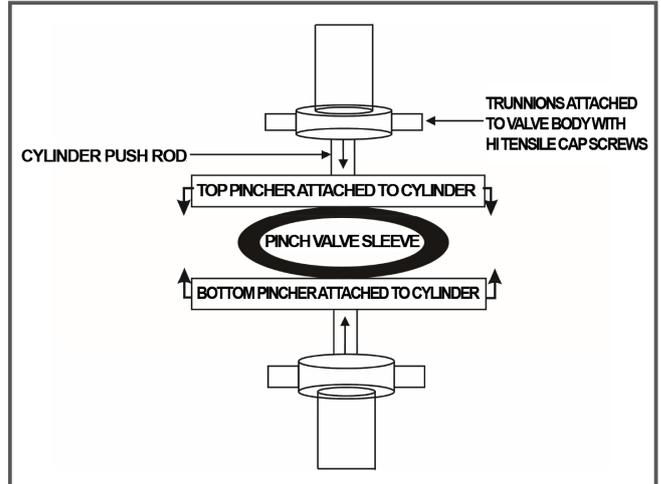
The valve is closed from both sides with the hydraulic cylinders firmly attached to the valve body using 4 x large diameter Hi-Tensile Bolts.
